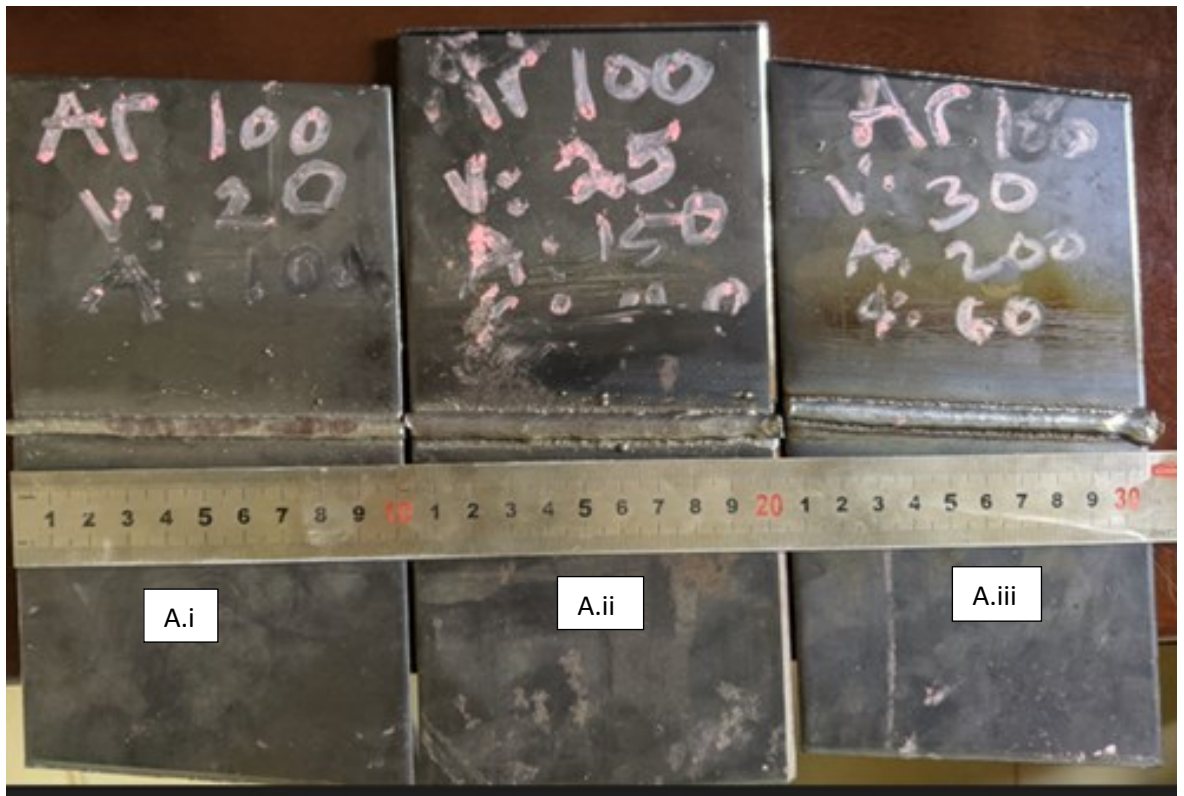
Appearance of the bead surface conditions for welded samples A. i; A.ii & A.iii.
